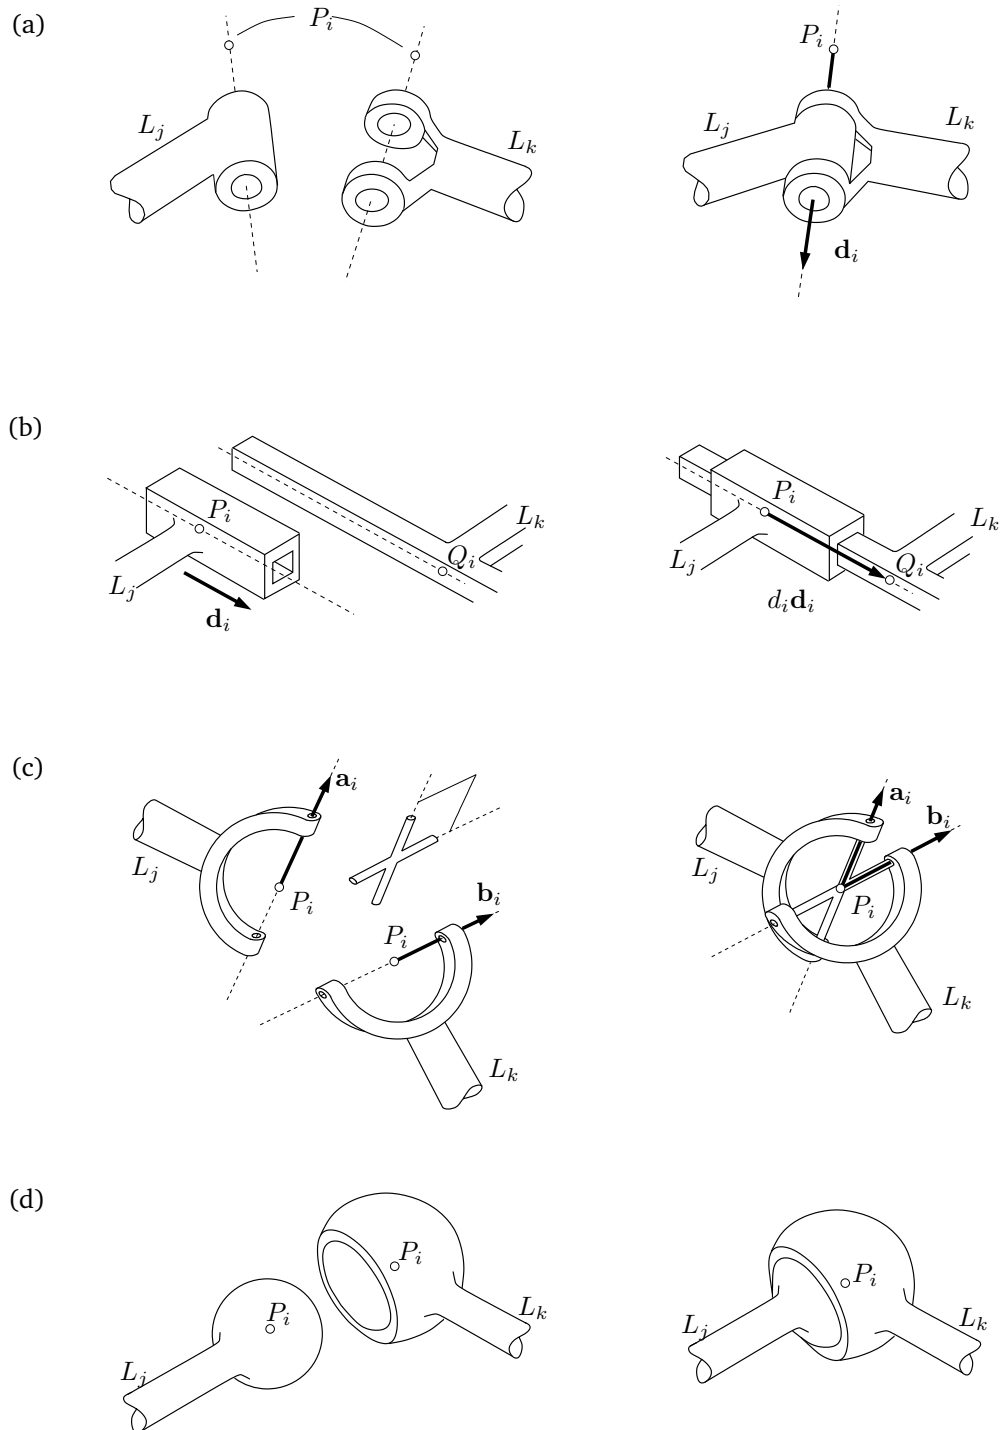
Geometric elements intervening in the assembly of (a) revolute, (b) prismatic, (c) universal, and (d) spherical joints.
